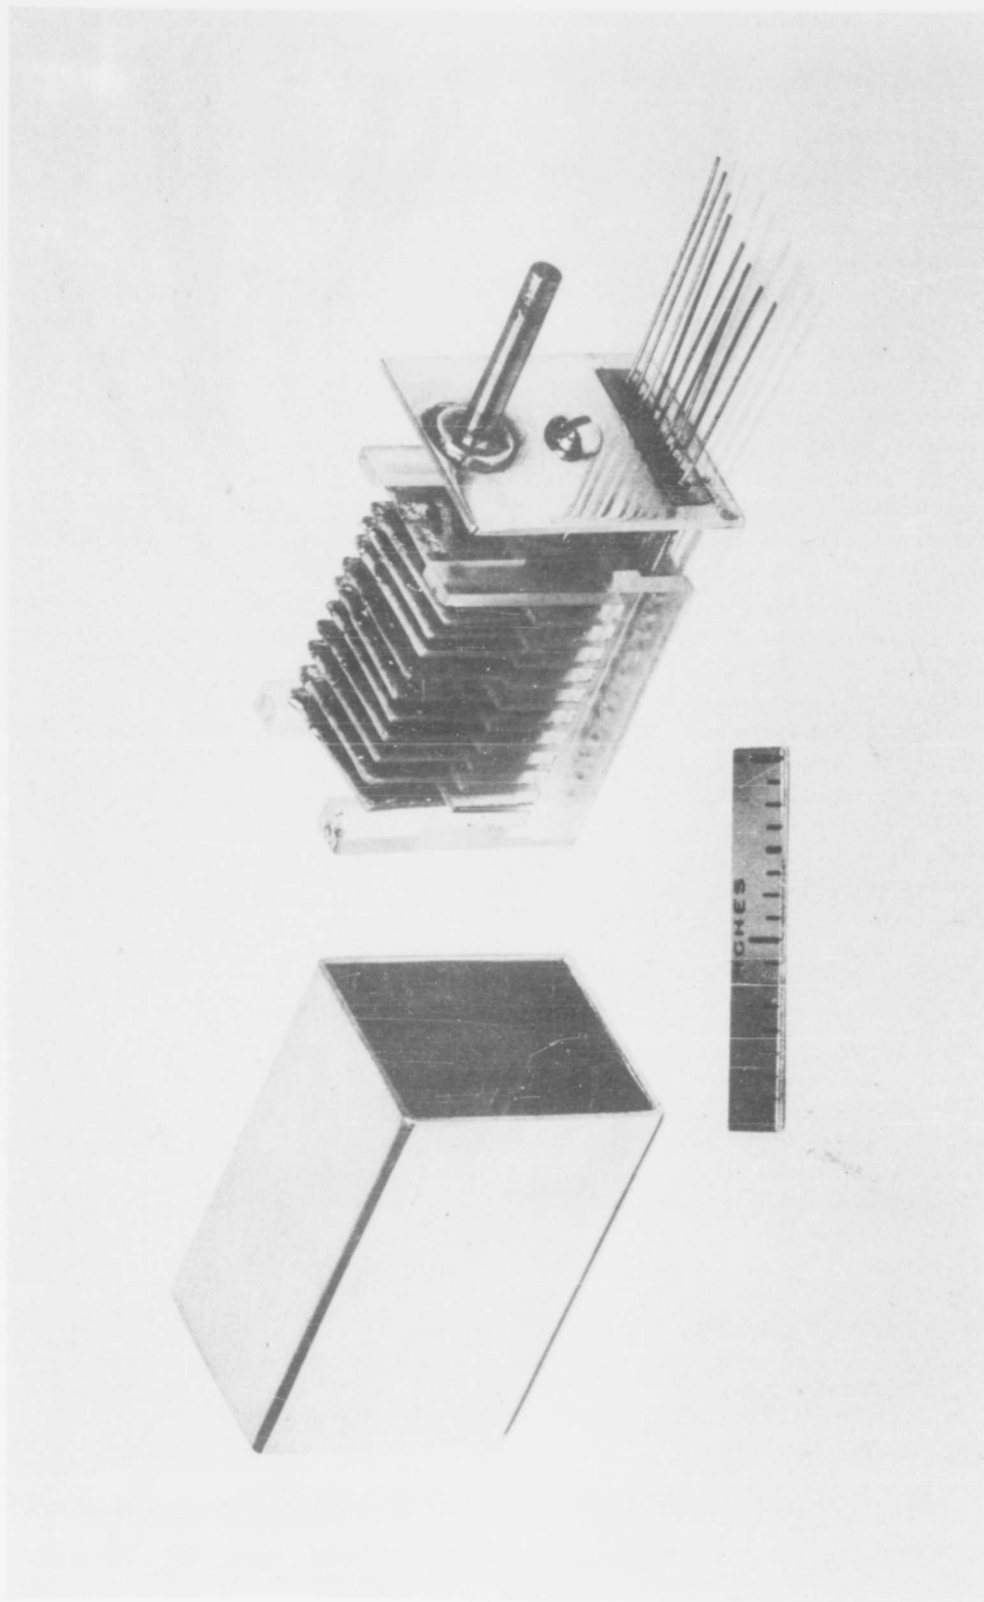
An 11-stage countdown unit assembled by welding techniques and capable of being hermetically sealed.
